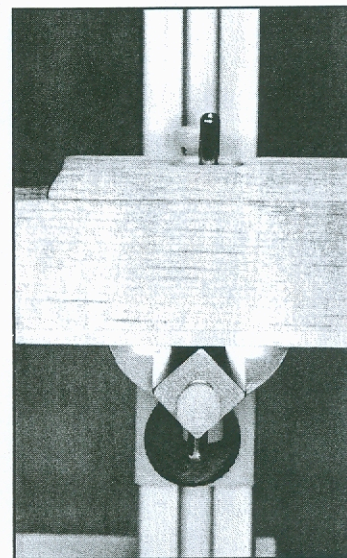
(LEFT) — Close-up of wedge jig for Front Weight measurement. Jig is fastened to roller bearing from photo 1 using set screw shown behind balance-rail pin. Photo 4 — (ABOVE) Key shown resting on wedge jig.
